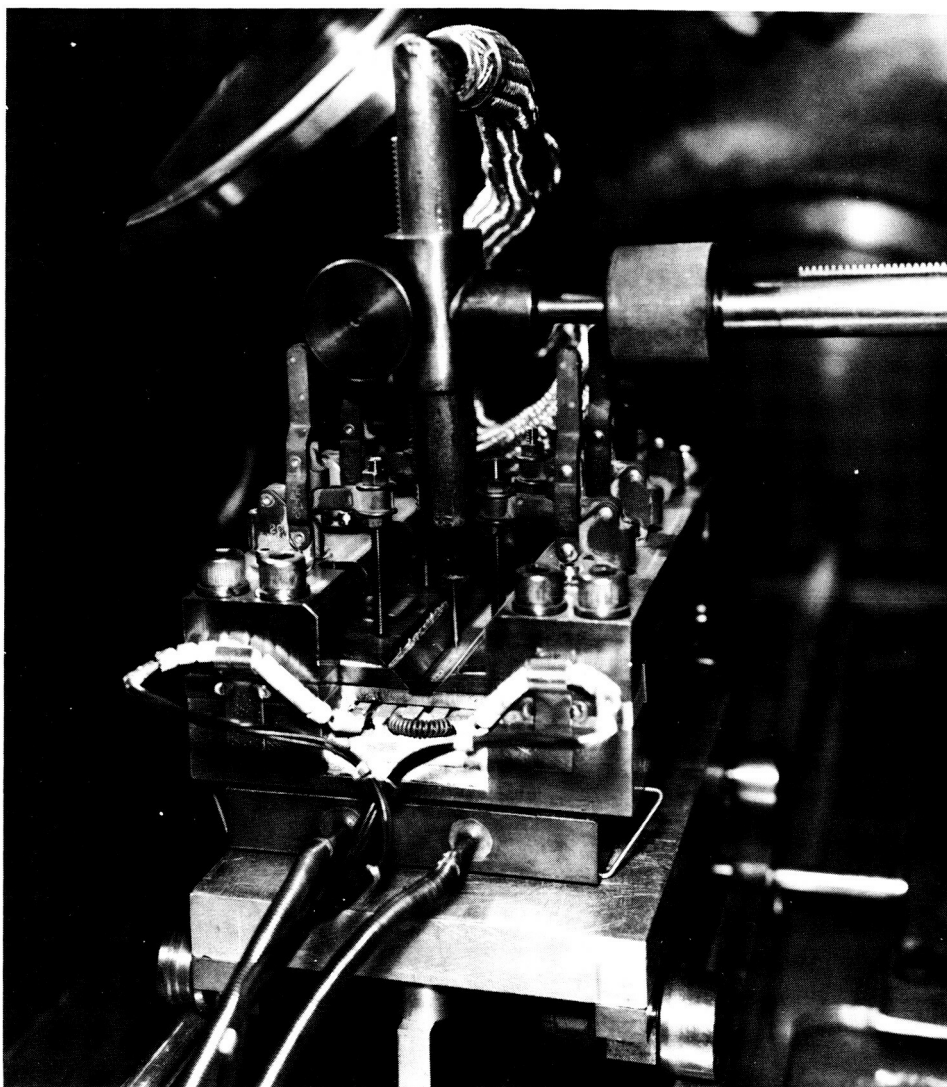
Sheet welding fixture used for welding tungsten-base alloys with preheat to 1400<sup>0</sup> F.
